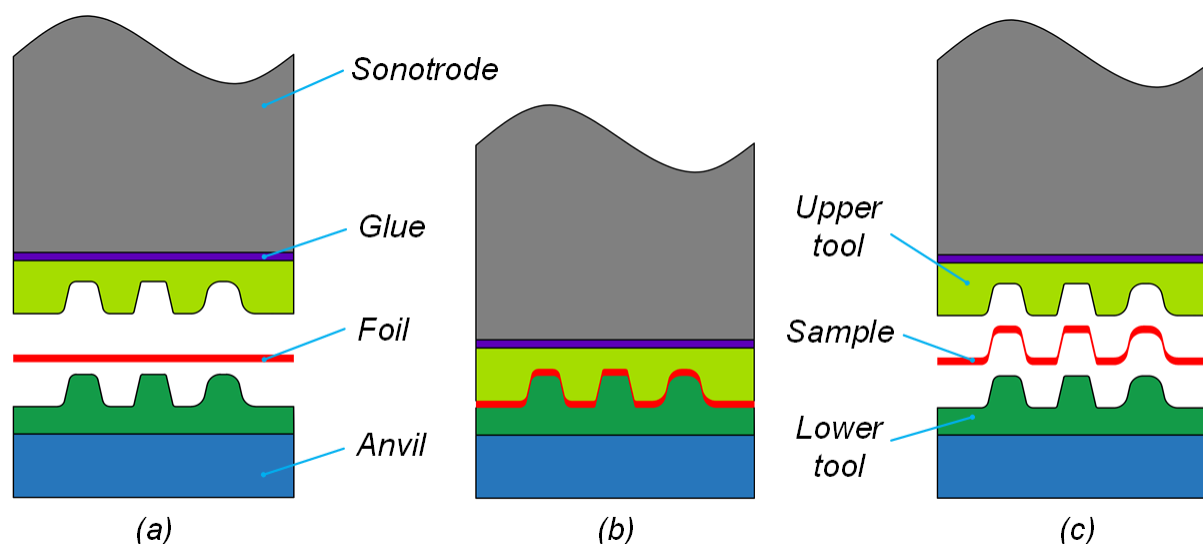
Ultrasonic thermoforming with a counter tool.
